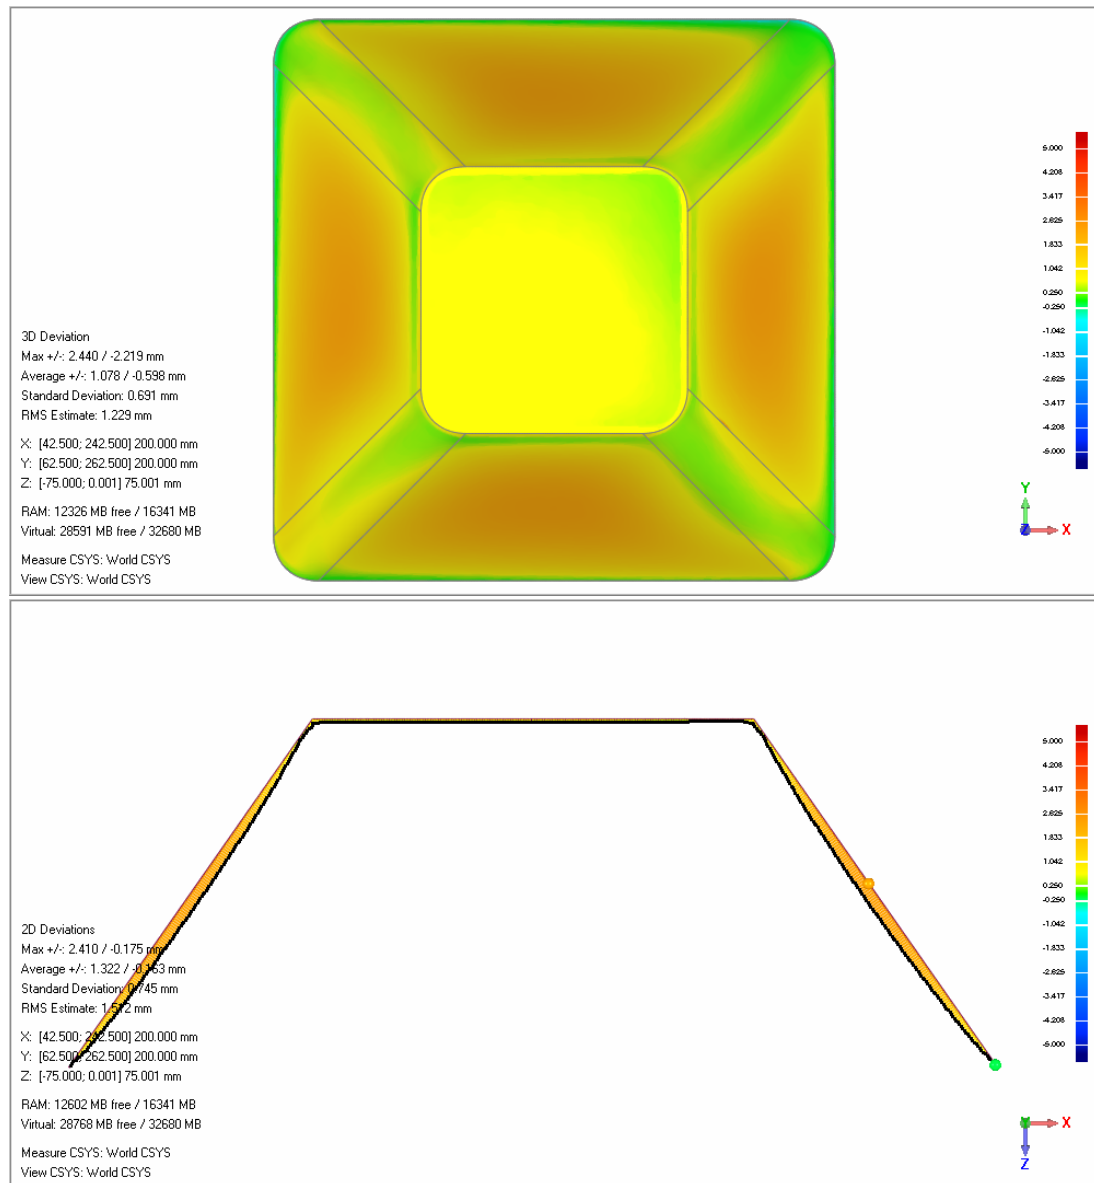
Part T6B geometric accuracy results - top view and cross-section view
